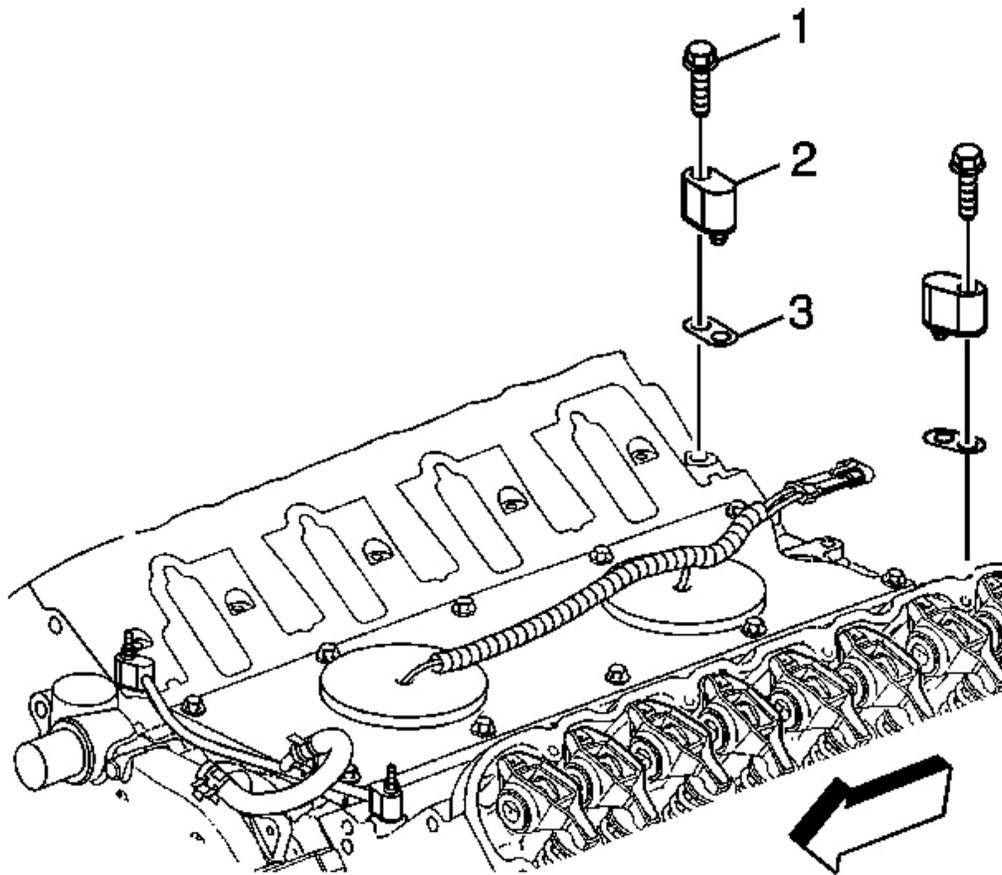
Coolant Air Bleed Pipe Covers, Bolts & Gaskets
